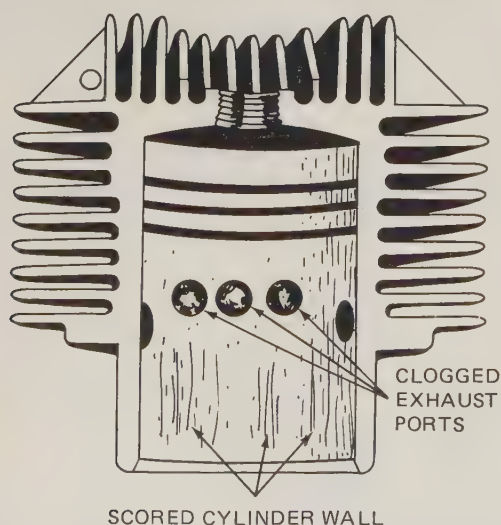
Cutaway view of cylinder head showing scored walls and clogged exhaust ports, caused by carbon deposits in the exhaust ports.
